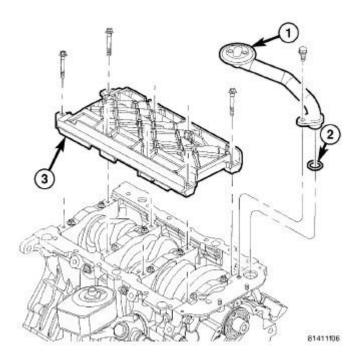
OIL PICK UP TUBE AND WINDAGE TRAY Courtesy of CHRYSLER LLC
